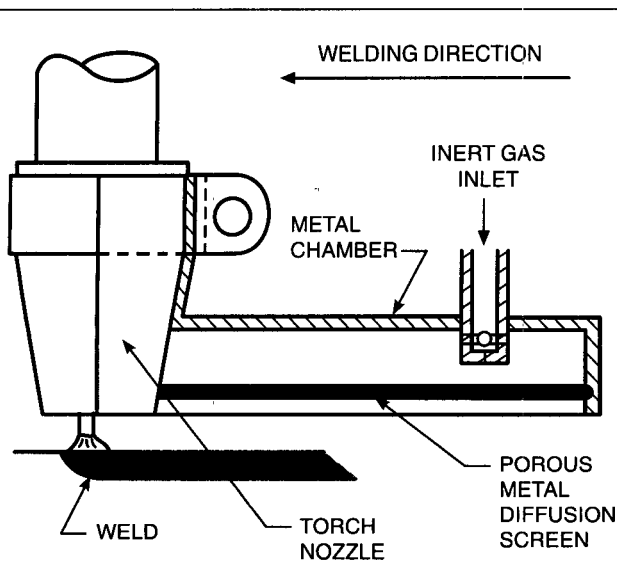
Torch Trailing Shield for Gas Shielded Arc Welding of Titanium and Other Reactive Metals
